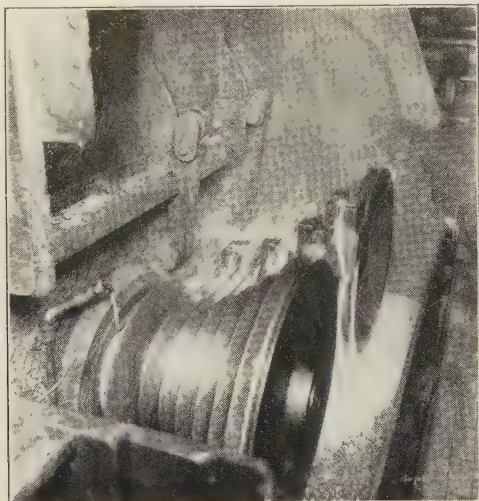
CLOSE-UP VIEW OF NO. 1 MACHINE
